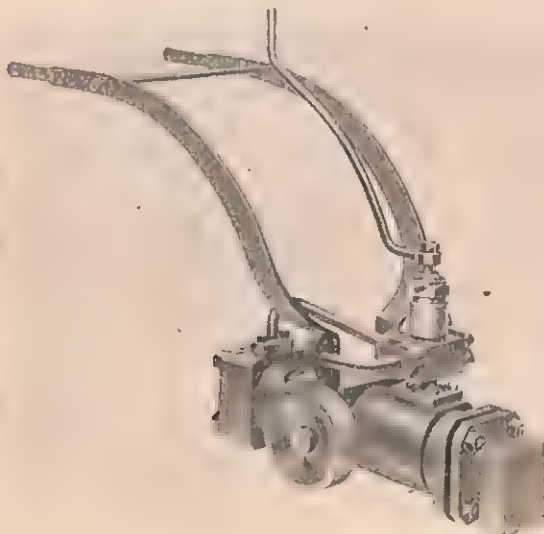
shows a Rotary Face Valve mounted on a Portable Frame Setting Machine. The valve has been mounted on the machine, making a compact and sturdy arrangement. The constant pressure supply pipe to the far end of the ram is rigidly attached, and the operating lever has been extended for ease of operation.
